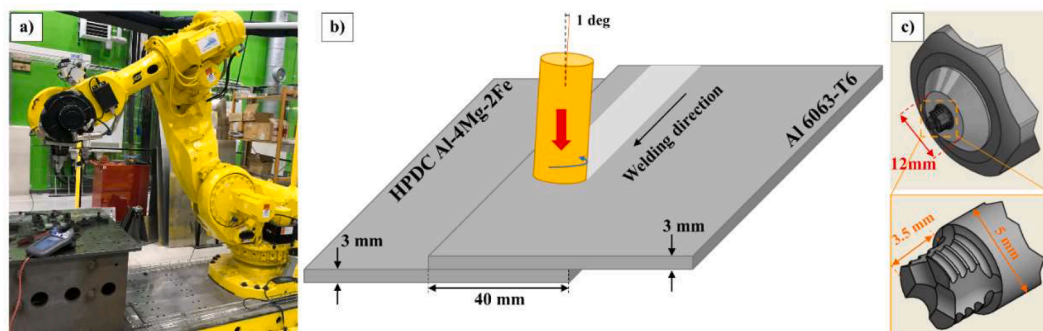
(a) FSW setup, (b) dimensions of the aluminium plates for SSFSW and (c) the schematic illustration of the stationary shoulder and three-flute crown pin.
